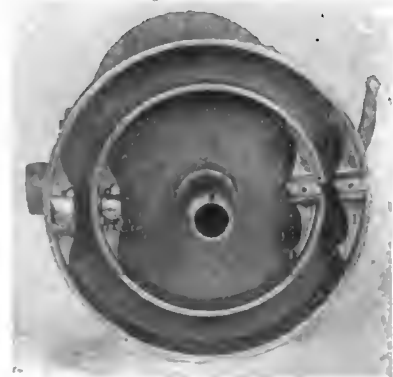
DETAILS OF ONE OF THE UNIVERSAL JOINTS.
